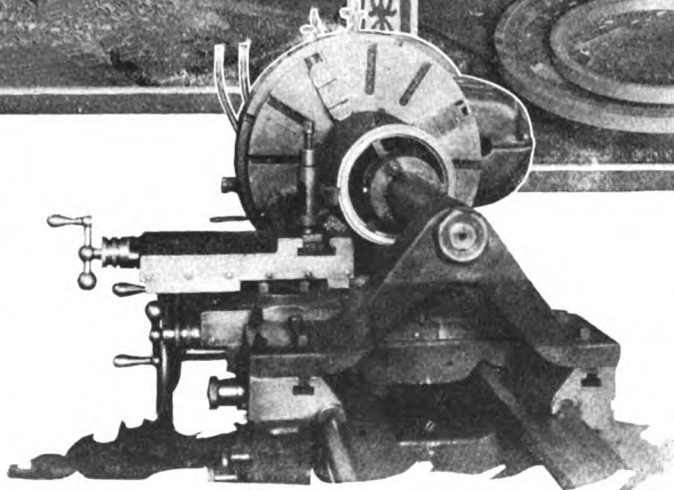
The upper view shows a tool which forms the packing ring and cuts it off—The tool is fed in three directions.
